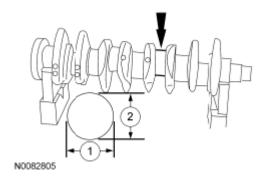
Identifying Measuring Directions Of Crankshaft Connecting Rod Bearing Journal Diameters
